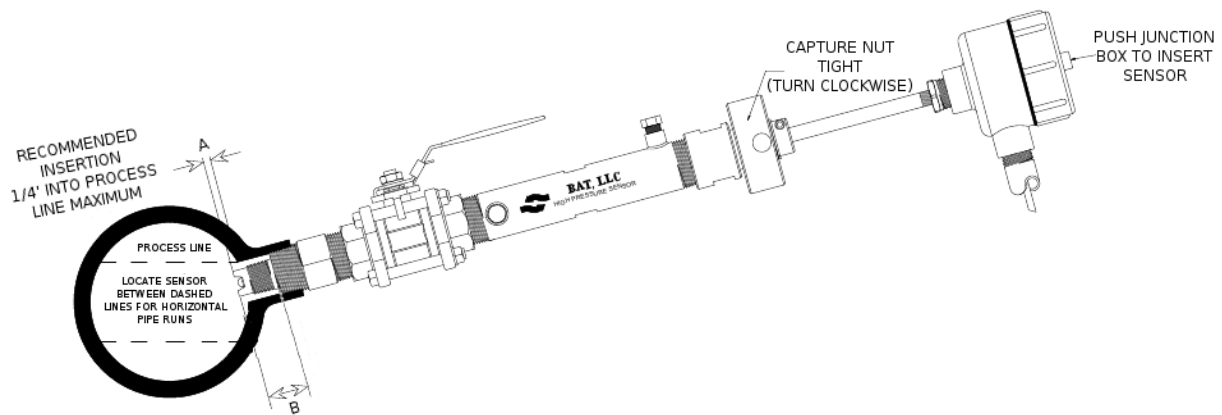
Hot Tap Assembly (Fully Inserted, Valve Open)
